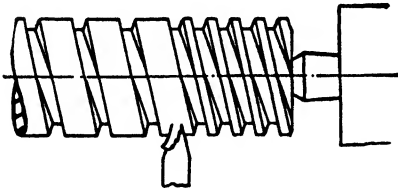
Cutting a Double-threaded Acme Screw—Second Operation.
